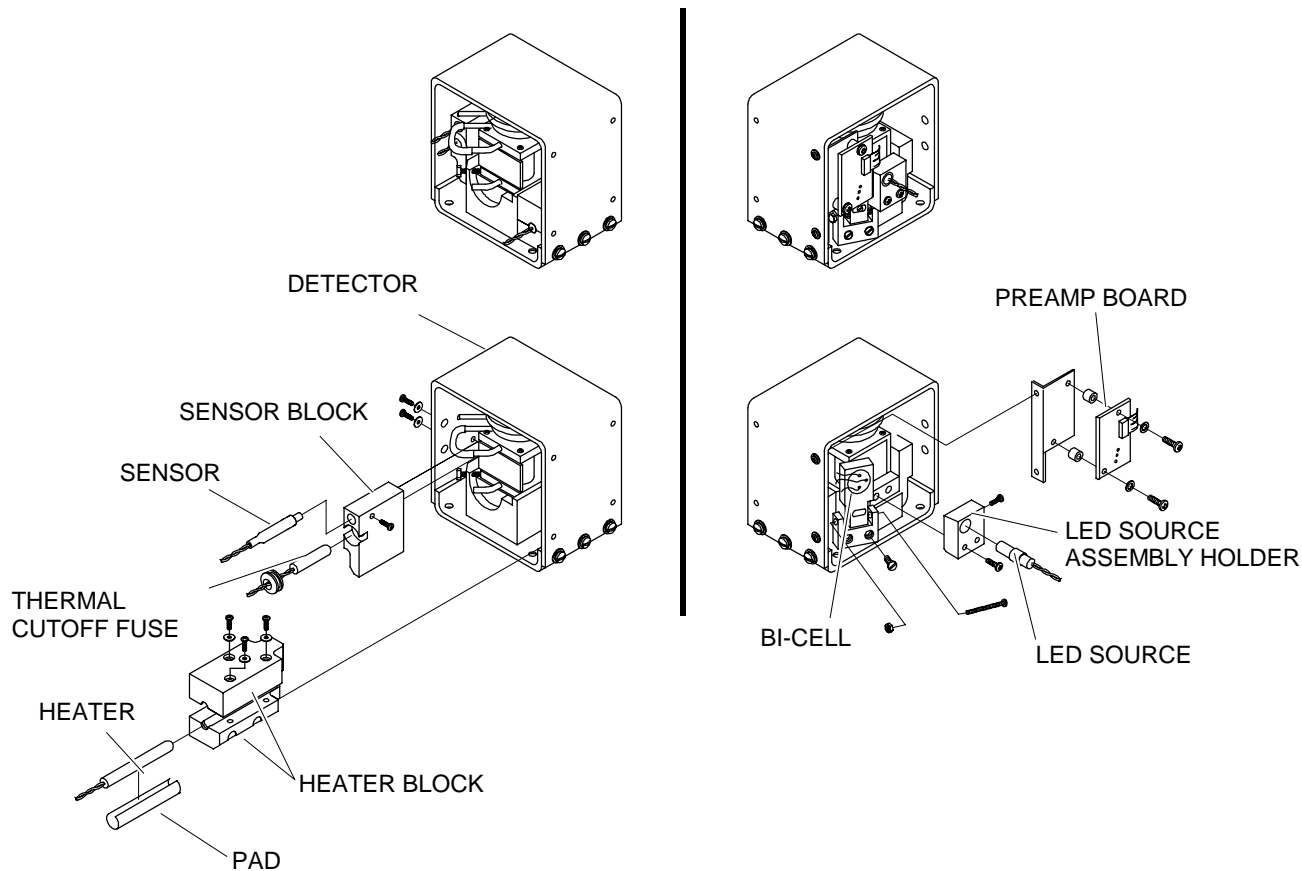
DETECTOR - EXPLODED VIEW
